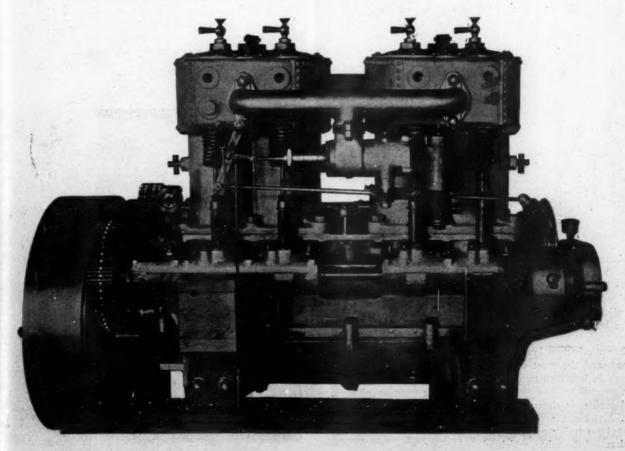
FOUR-CYLINDER MOTOR OF S. & M. SIMPLEX CAR READY FOR FITTING IN FRAME
